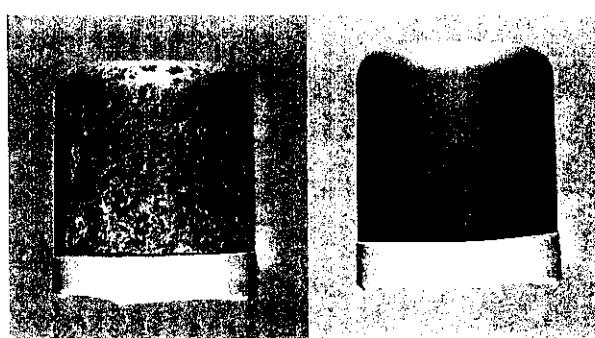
Appearance of formed parts after salt spray test (after 48 h)
